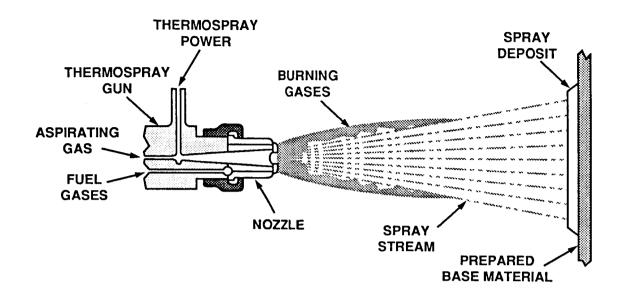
COMBUSTION FLAME SPRAY GUN
